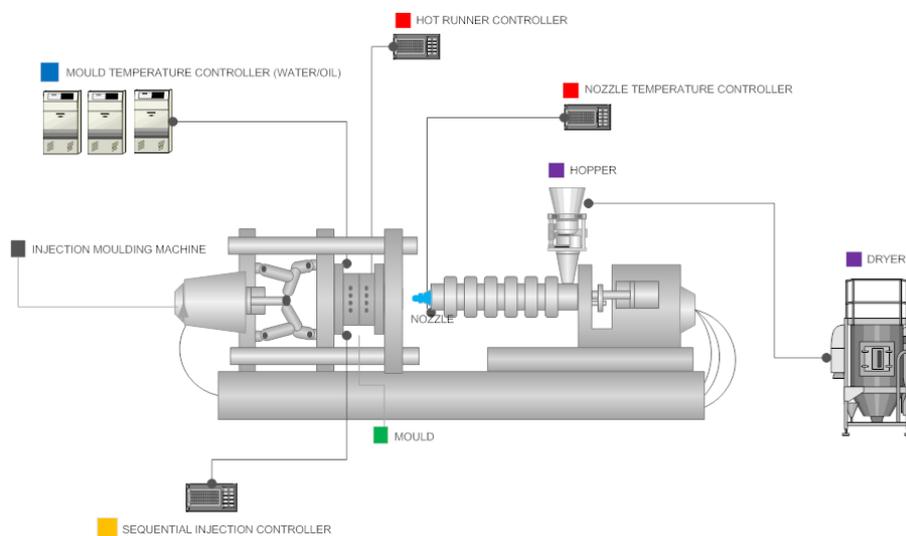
Schematic of an injection moulding production cell and related equipment layout
